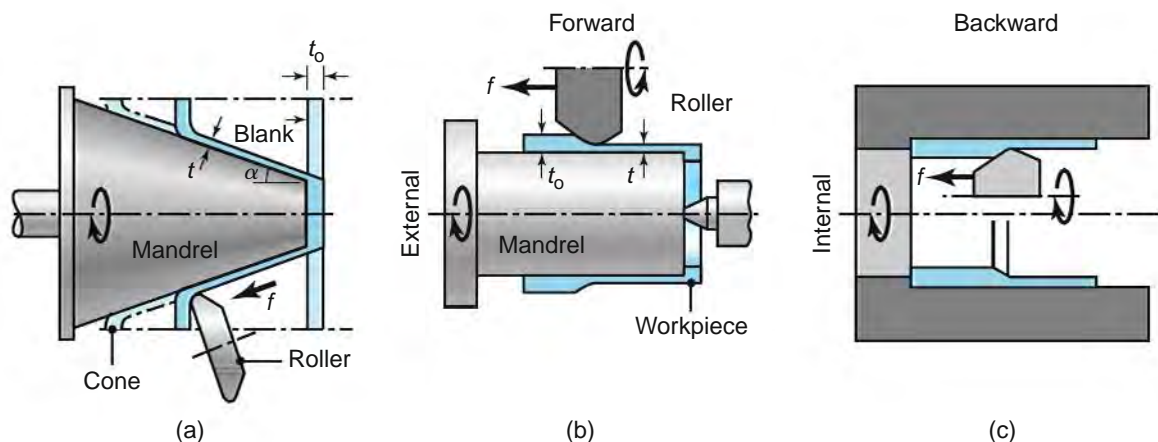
(a) Schematic illustration of the shear-spinning process for making conical parts. The mandrel can be shaped so that curvilinear parts can be spun. (b) and (c) Schematic illustrations of the tube-spinning process.
